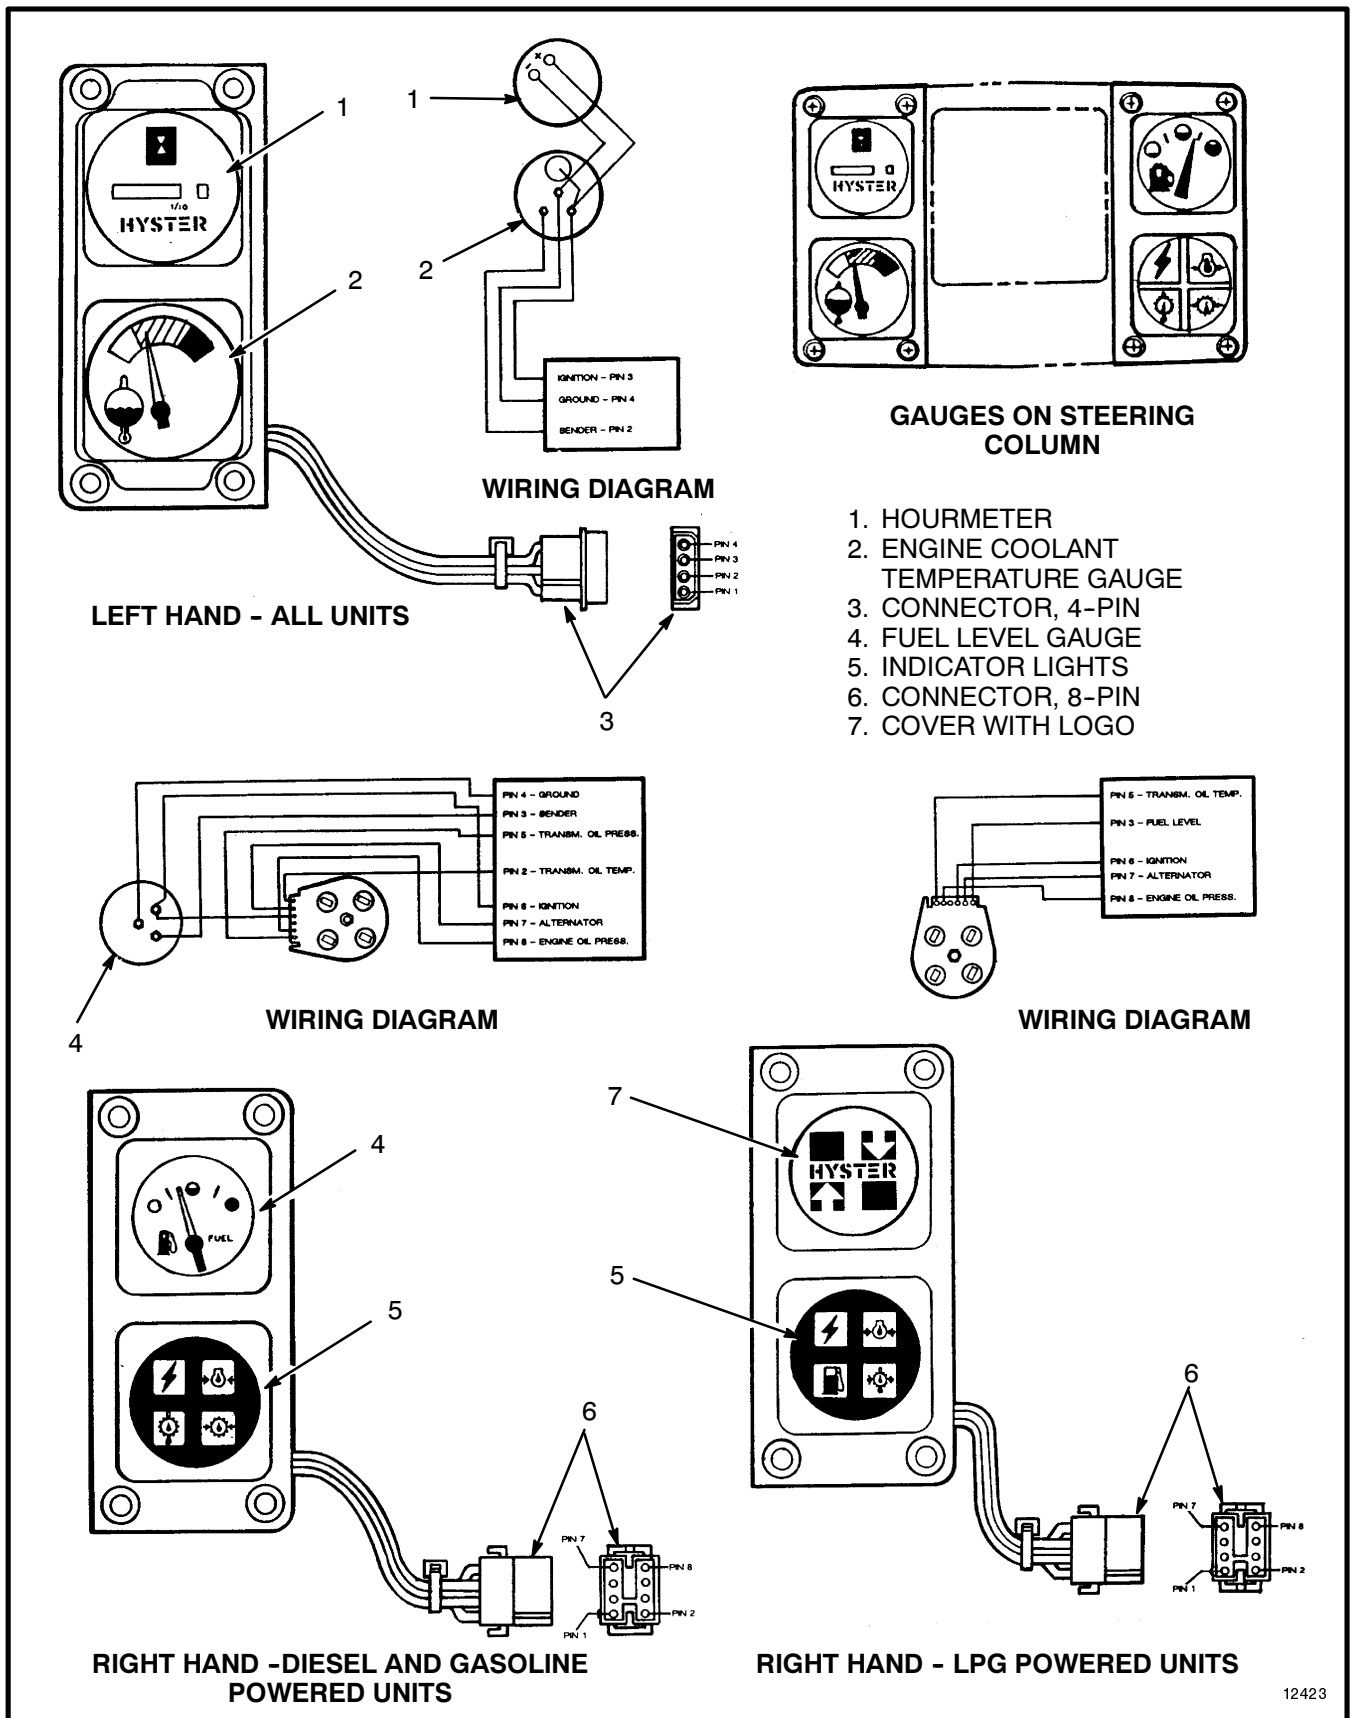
TYPICAL METERS ON STEERING COLUMN ASSEMBLY FOR LIFT TRUCKS WITH ENGINES
